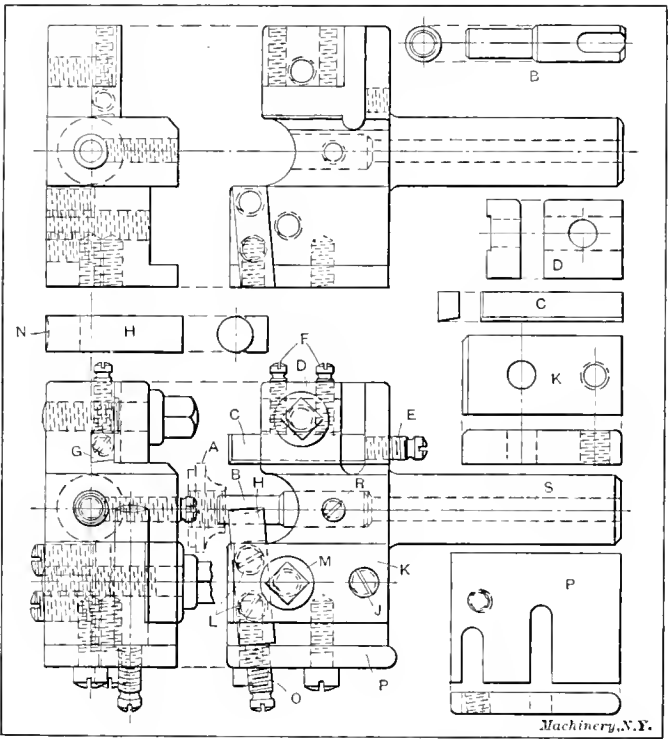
Finishing Box-tool for Ball Bearing Cone
